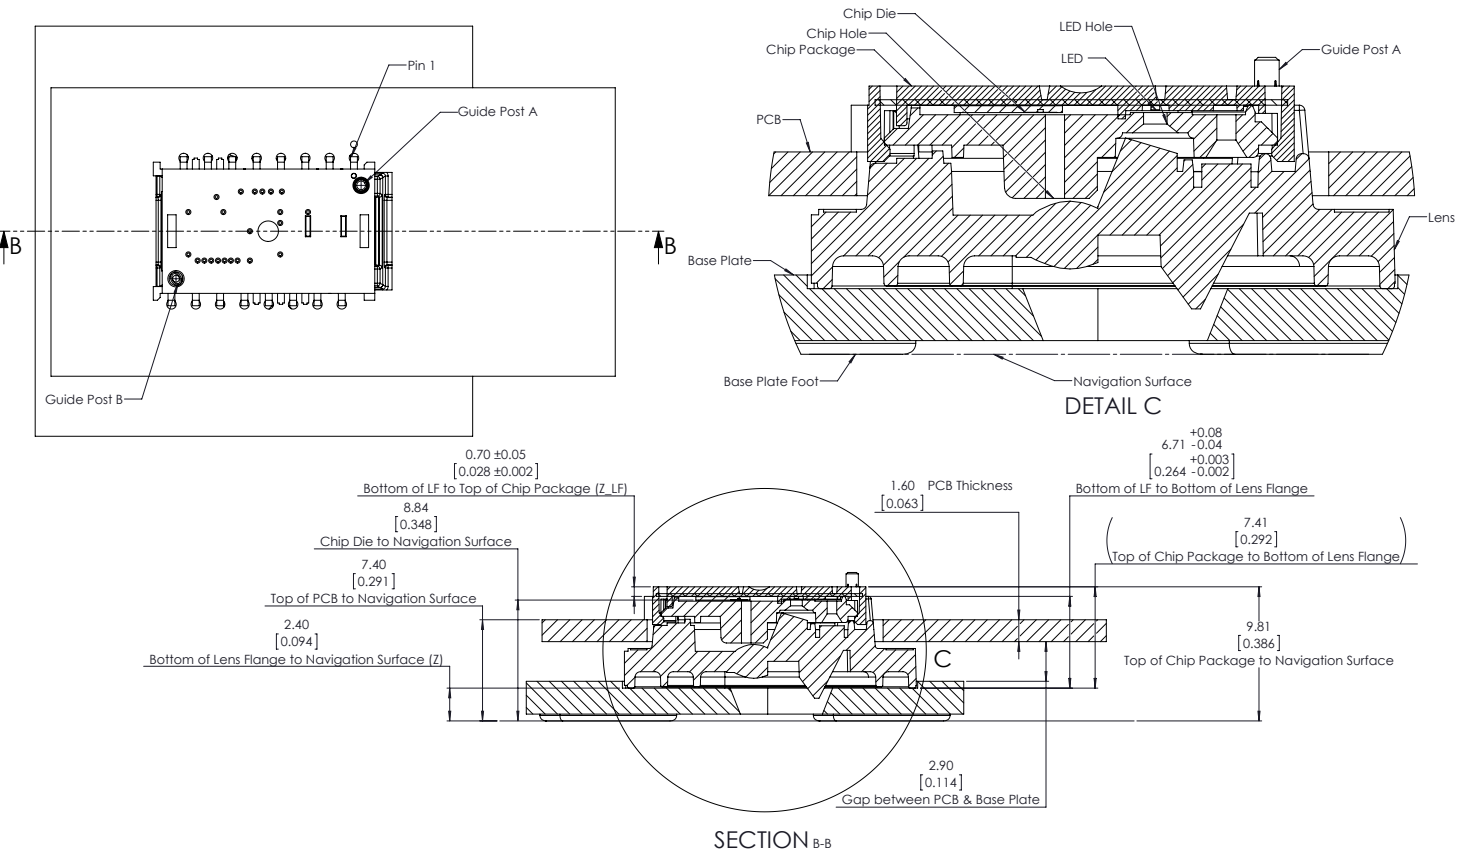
Assembly drawing of PMW3360DM-T2QU and distance from lens reference plane to tracking surface (Z)
